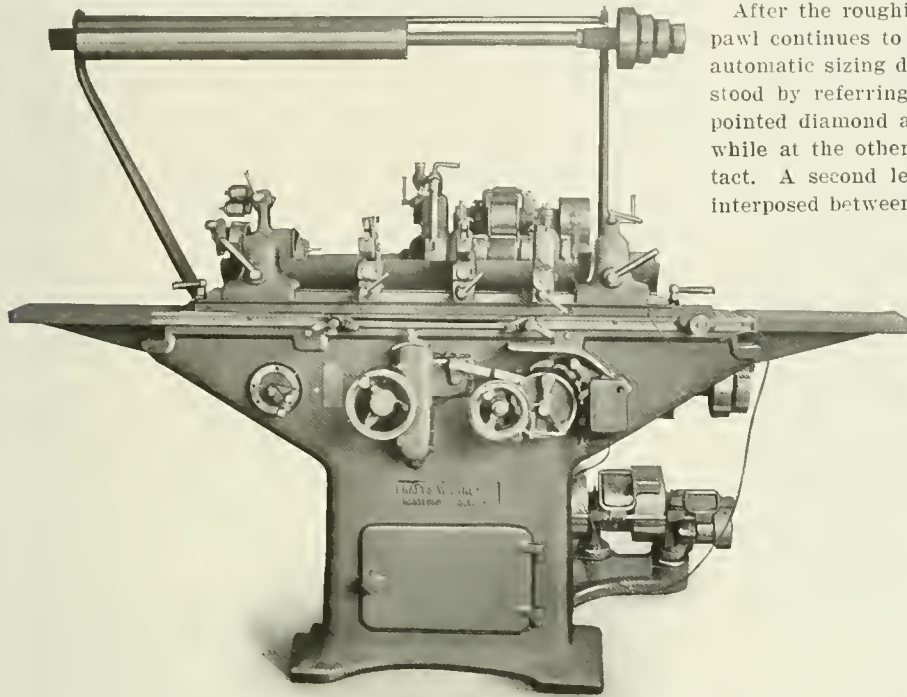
Front View of the Pratt & Whitney Cylindrical Grinder with Automatic Sizing Attachment
